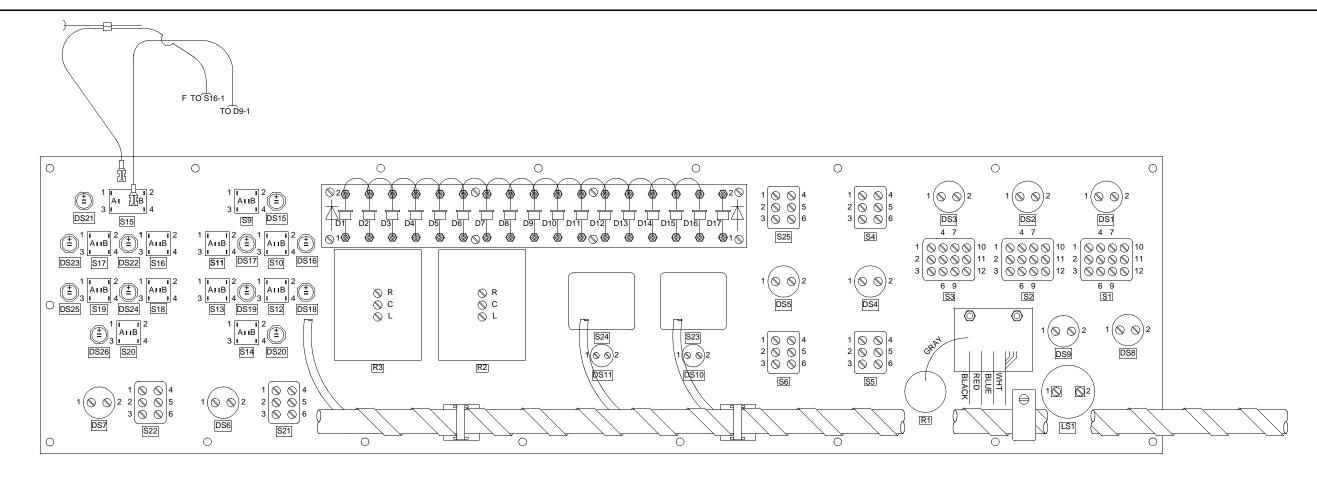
MCS Operator Cab Schematic (Sheet 6).
